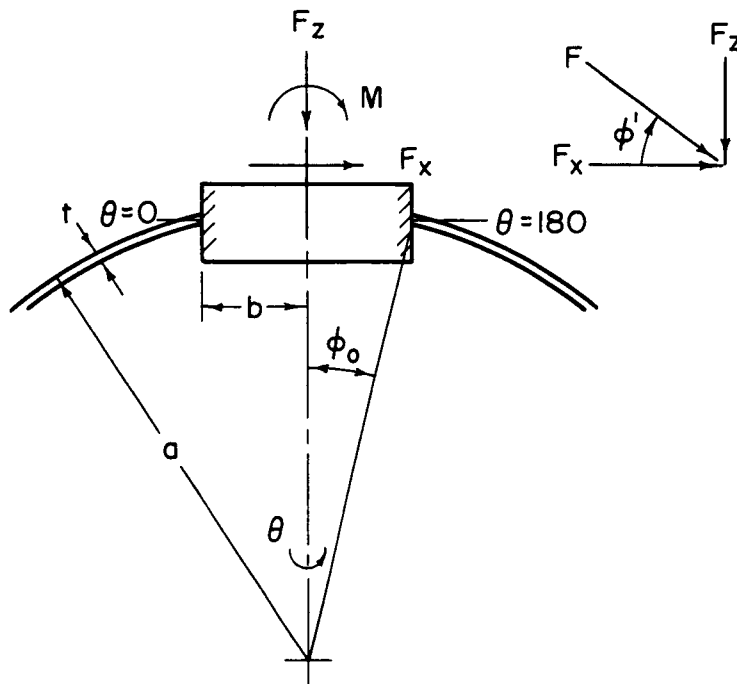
TYPES OF LOADINGS AT PIVOT SUPPORT ON FRAME
